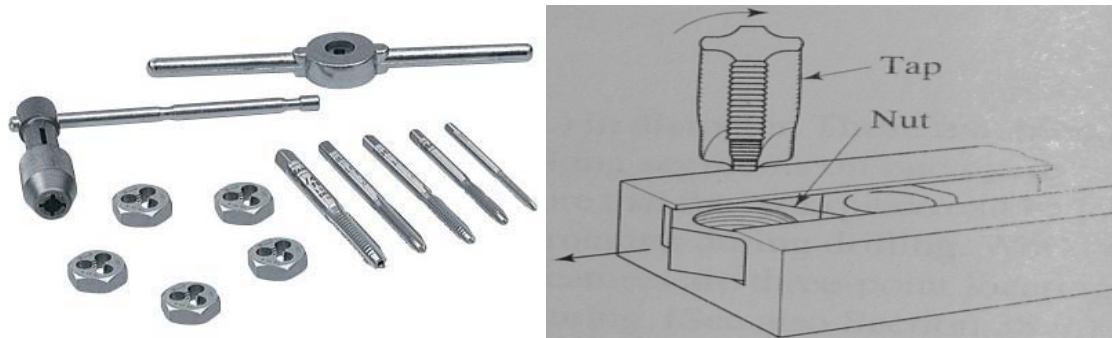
Thread-cutting. A drilled hole can be given internal threads by using a tapping tool; external threads on a cylindrical shape are made using a tapping die. The left image shows manual tool set for making external and internal threads. The right image shows a schematic for automatic tapping of threads in nuts.
